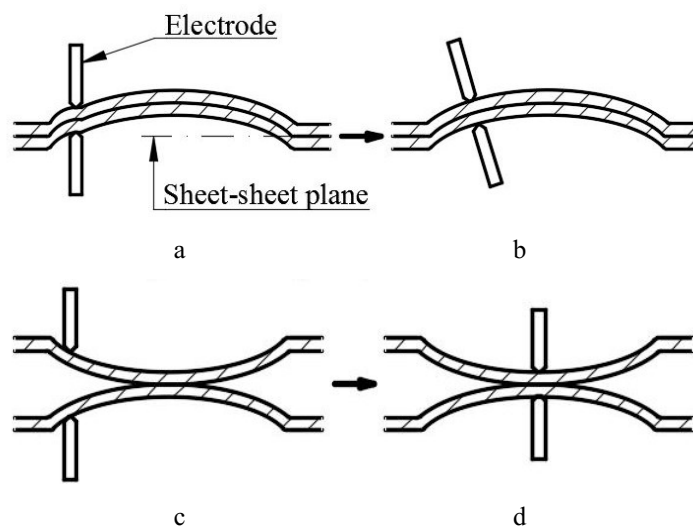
Electrode positioning: a) orthogonal to the sheet-metal plane with deformation in the joining zone (pairs FS or FW); b) corrected electrode positioning orthogonal to the sheet surface (pairs FS or FW); c) orthogonal to the sheet plane with deformation in the welding zone, (pairs WW); d) electrode positioning taking into account the structure orthogonal to the sheet surface, (pairs WW). [83]
